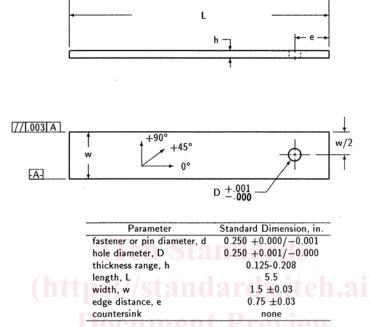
Double-Shear and One-Piece Single-Shear Test Specimen Drawing (Inch-Pound)
